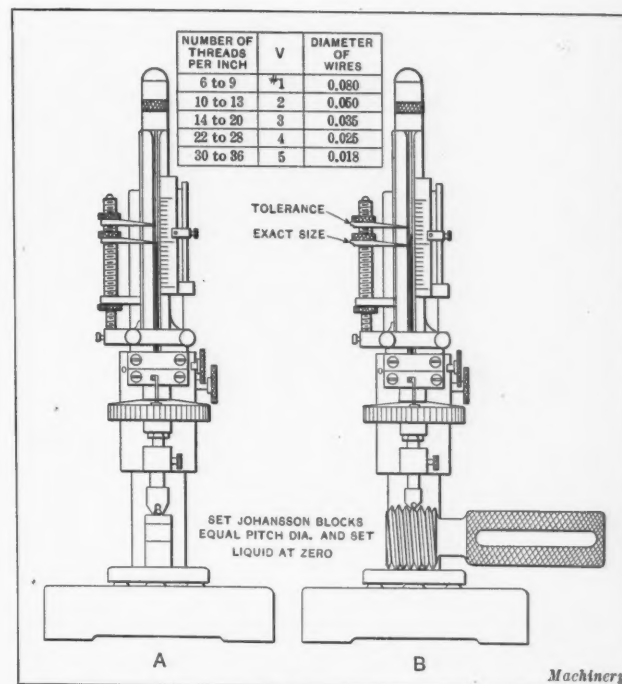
Illustration of Method of Procedure in setting Pitch Diameter Measuring Machine
